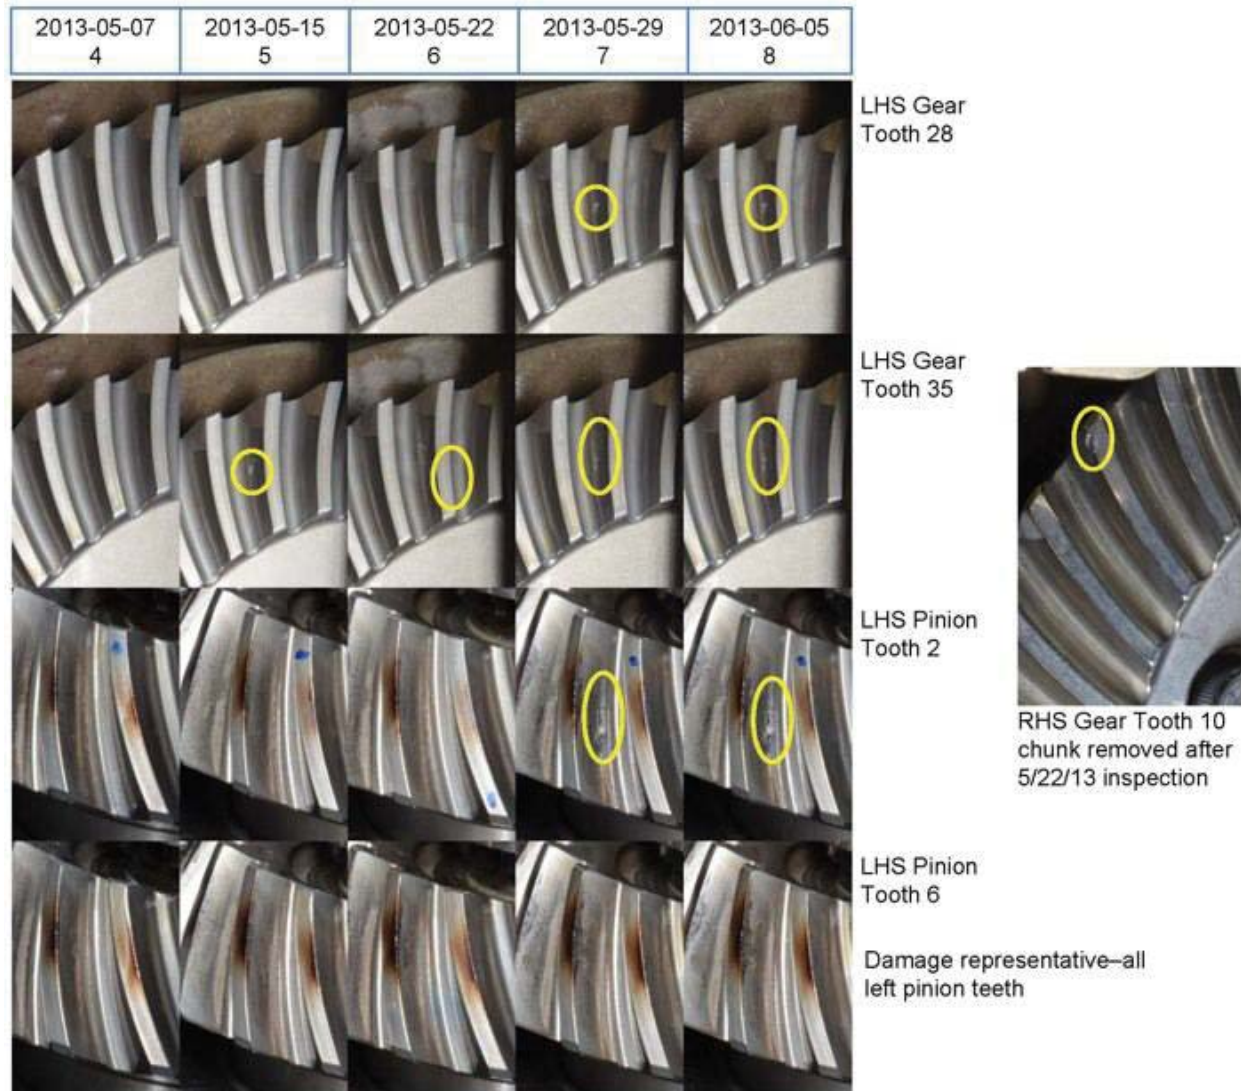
Test L3030R5050 pinion and gear damage modes.
